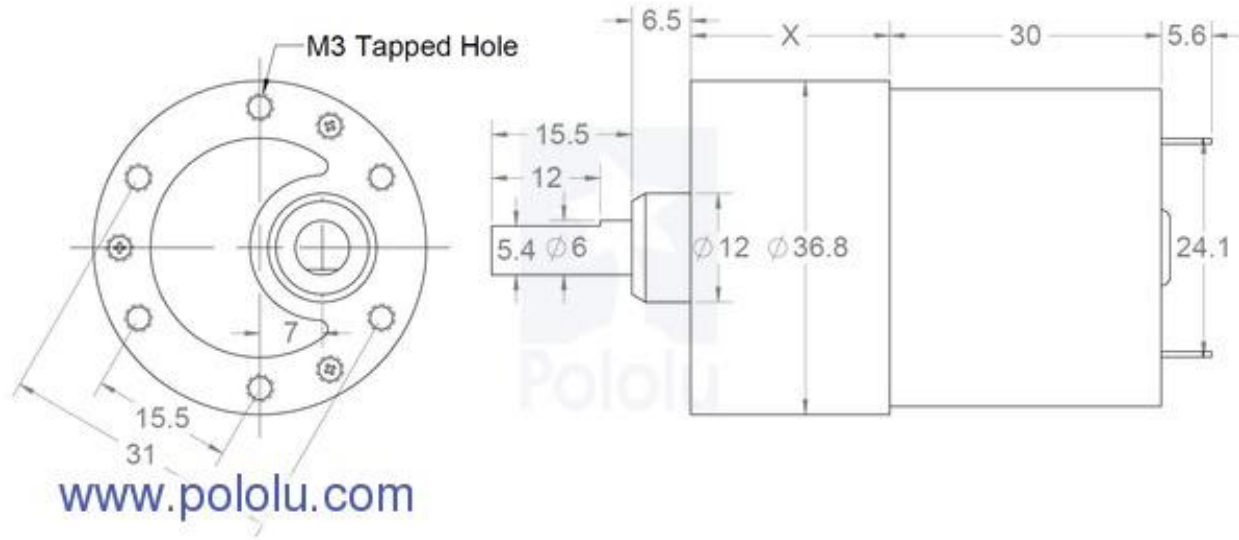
37D mm metal gearmotor dimensions (units in mm)
